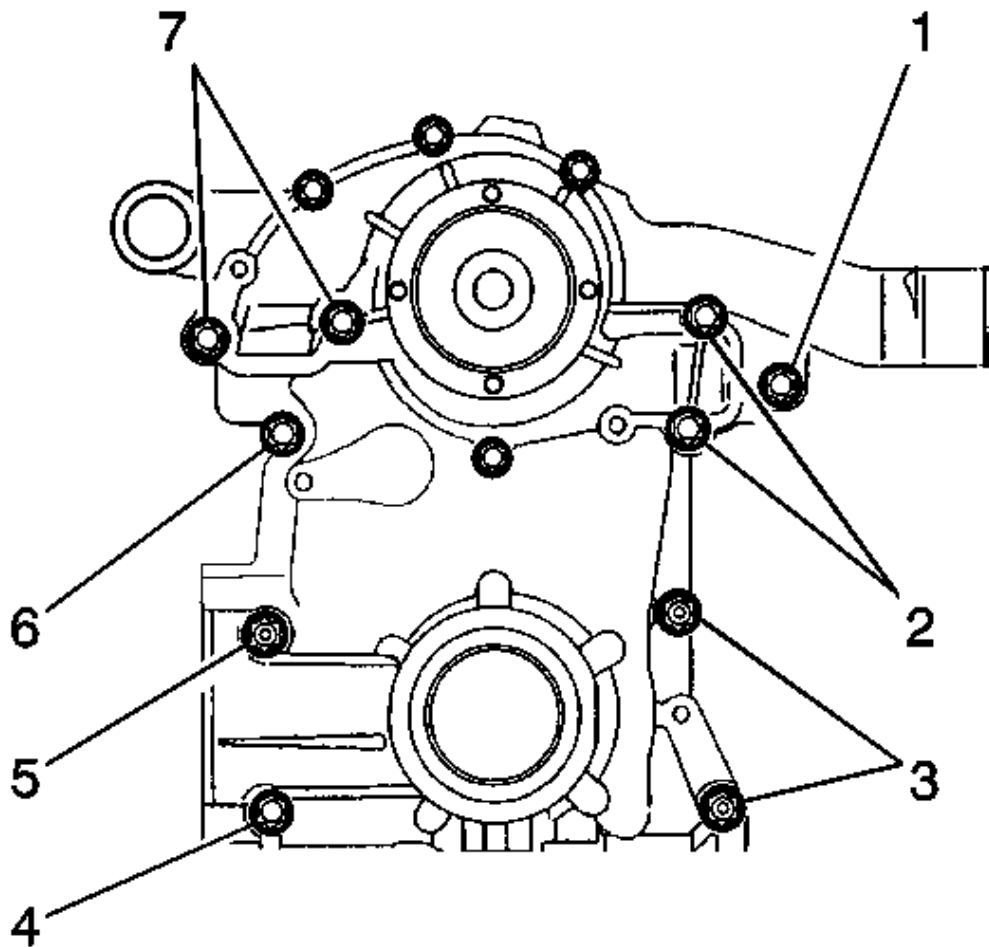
Engine Front Cover Bolt Tightening Sequence
